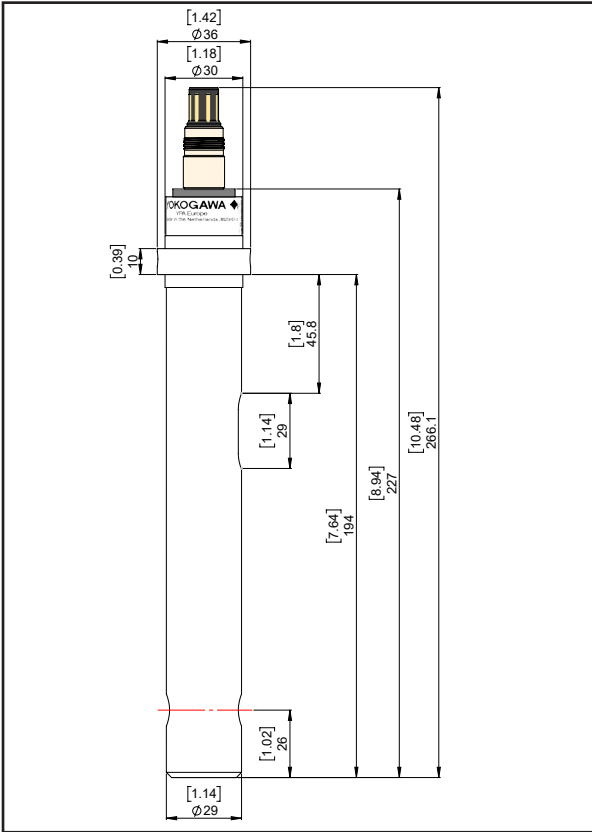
Dimensions of SC42 SP24 / SK24 (in mm [inches])
